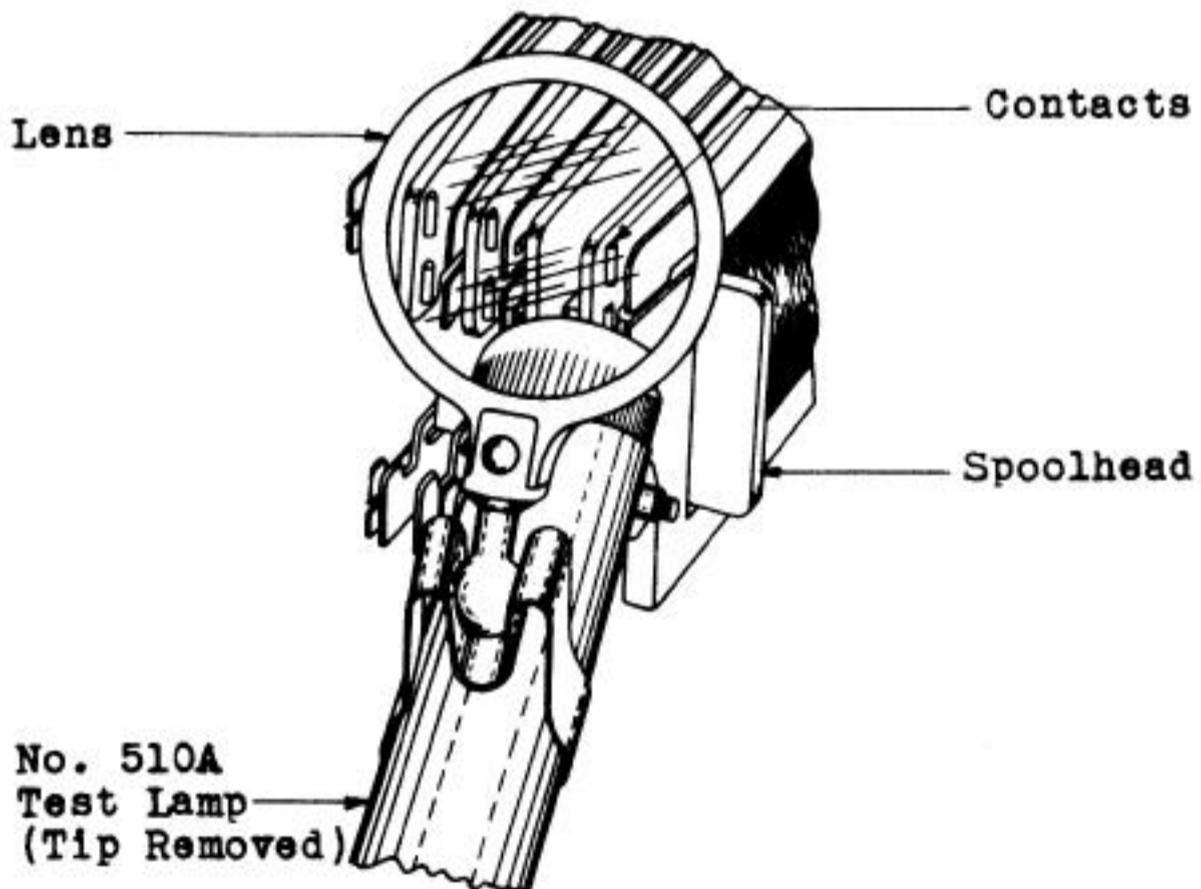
Method of Inspecting Contacts for Pits and Buildups
